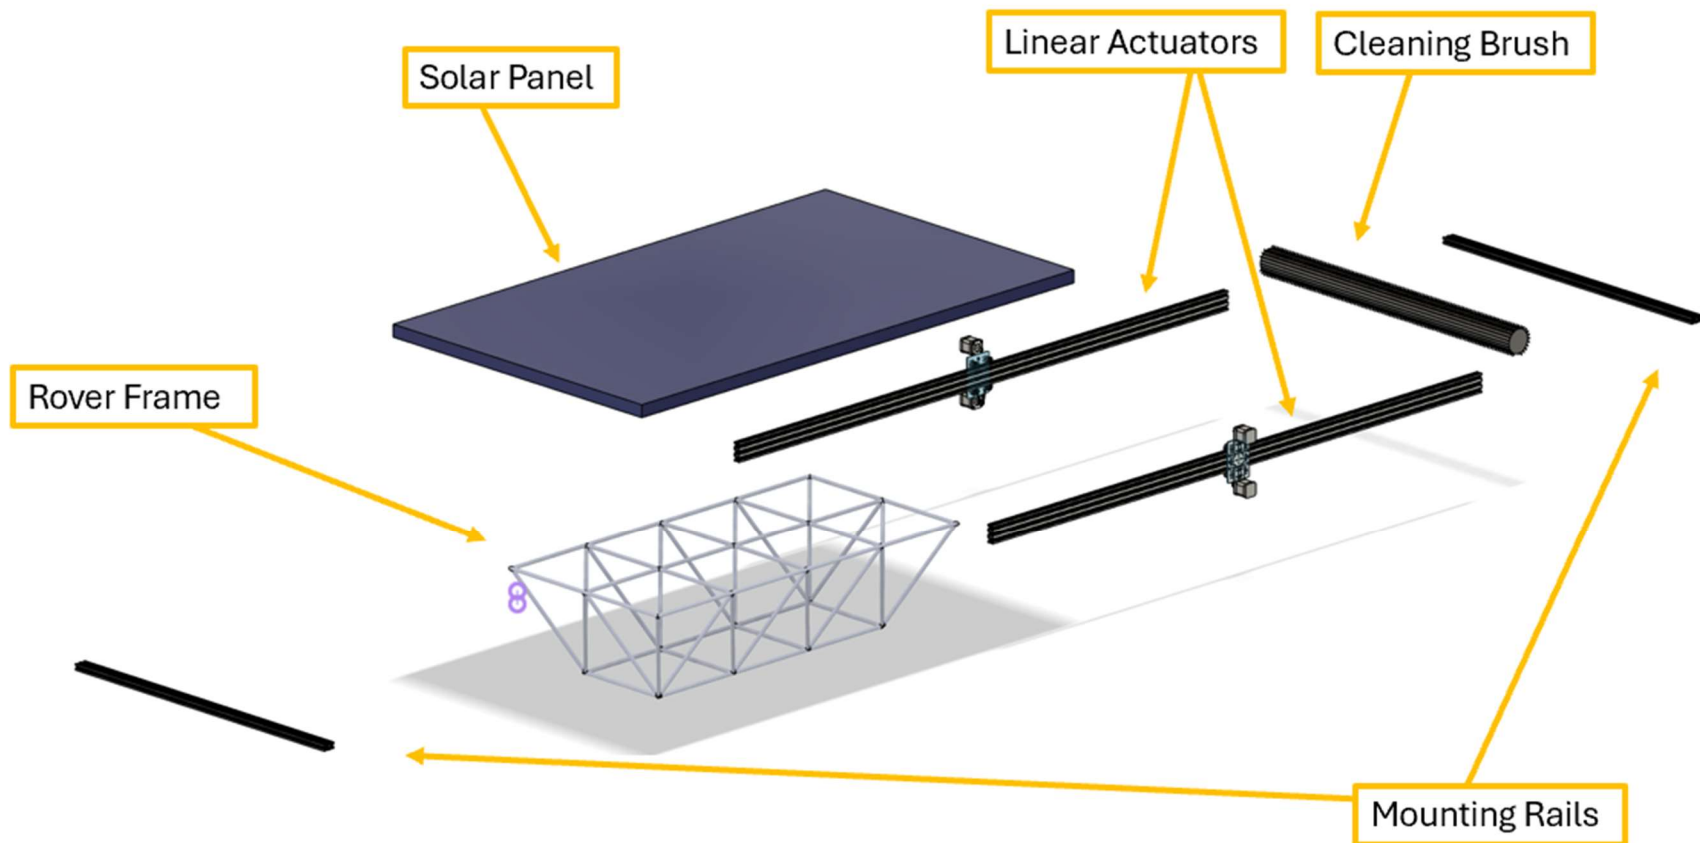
Exploded View Assembly Drawing of Prototype – Sub-System Level
